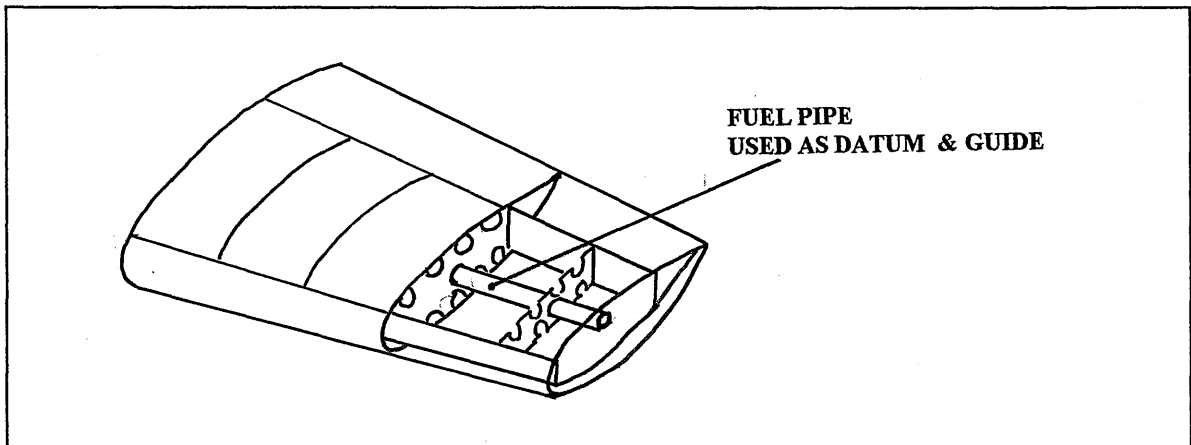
Integrated Tooling - Wing Box Components
